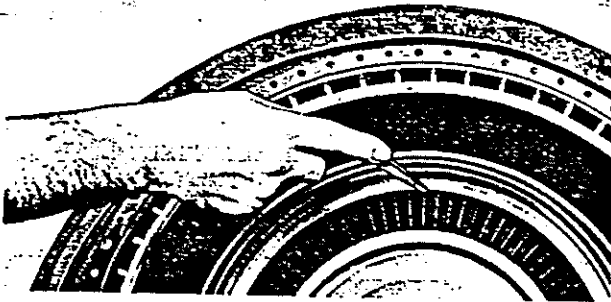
Checking First Stage Turbine Blade Tip Clearances
